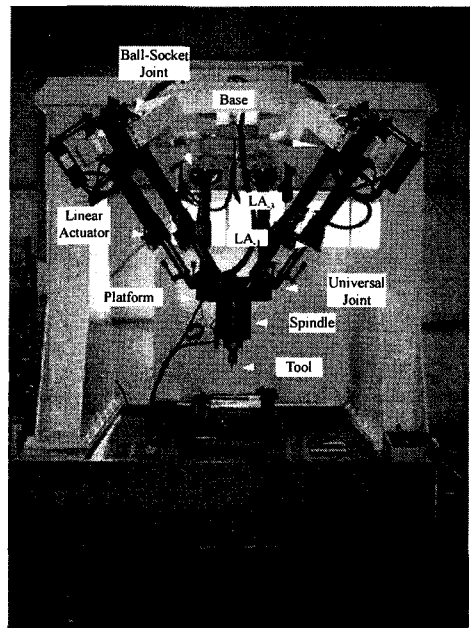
Parallel-typed CNC machine constructed for a machining center
